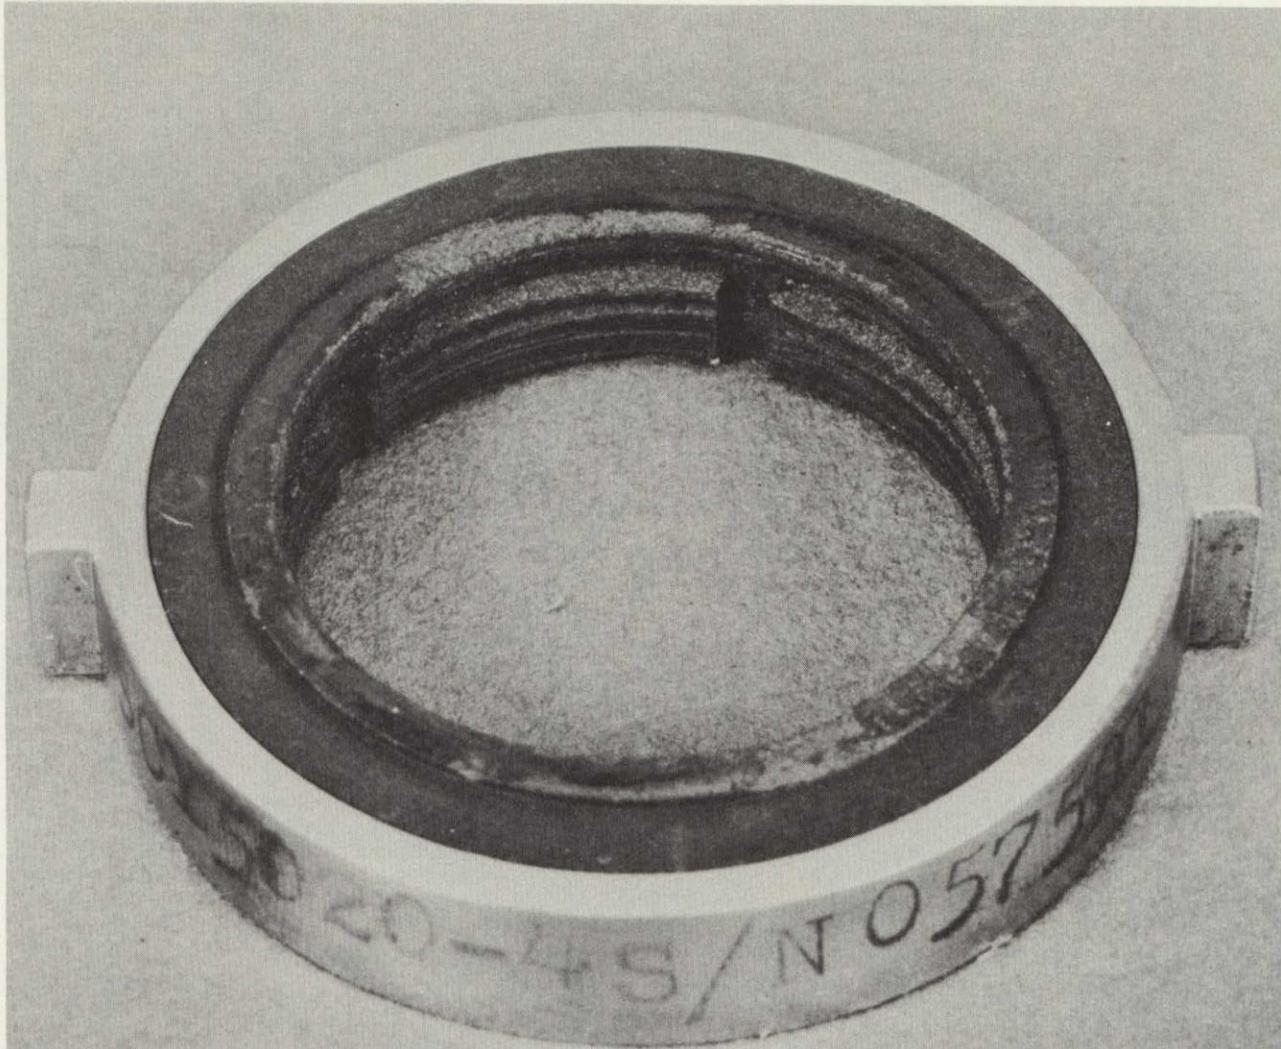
Helium Seal LOX Side Ring (P/N RS0096393X, S/N 01, Damaged by Bearing Failure Posttest 092)
